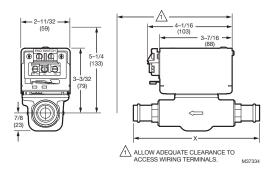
Dimensions (V8043F). Measurements in inches (mm). See Table 1.
